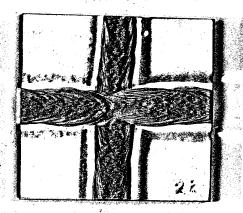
Welded Specimen of 1/8" Thick Sheet
